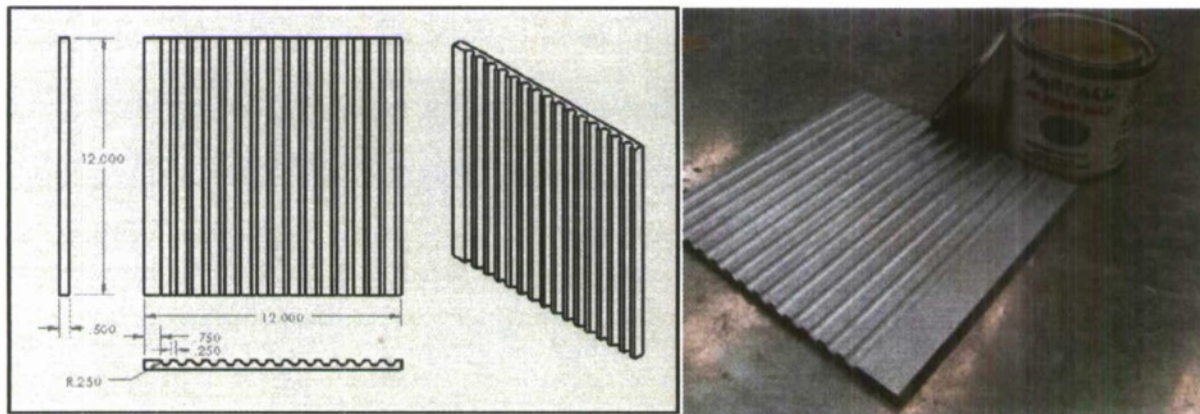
Shear key mold and CAD drawing used in production of actual shear keys.
